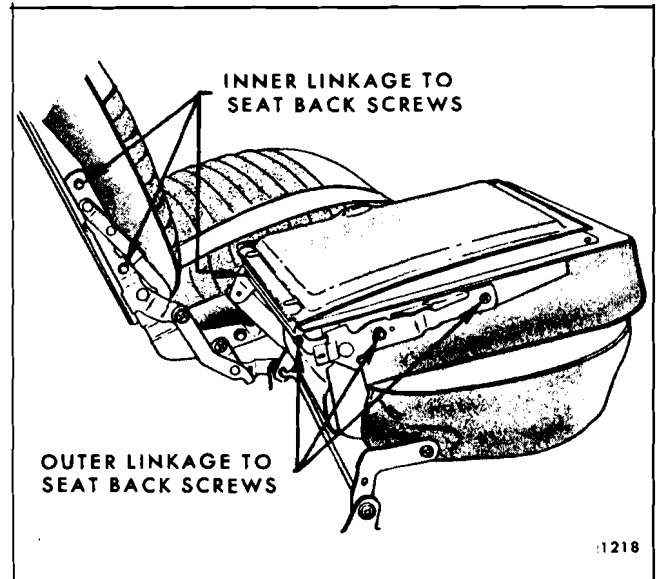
Seat Inner and Outer Linkage (Vista Cruiser and Sport Wagon Styles)
